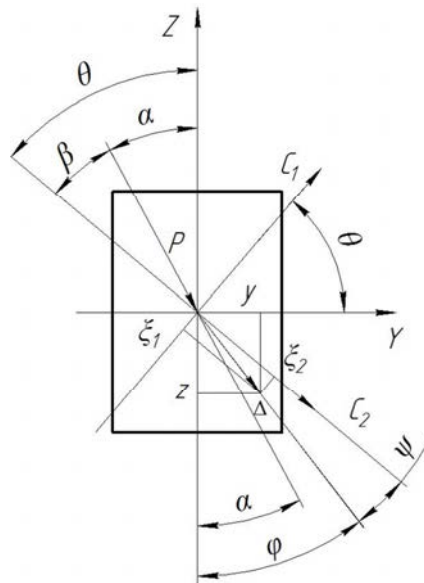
Cross section of the tool-holder that experiences an unsymmetrical bending.
